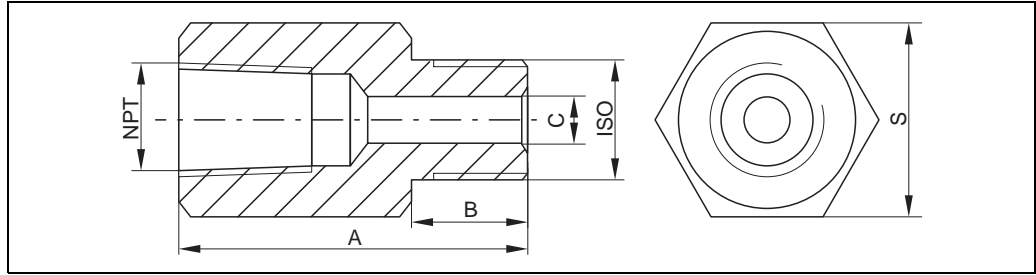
Dimensions of Adapter NPT inner thread on conical ISO external thread
